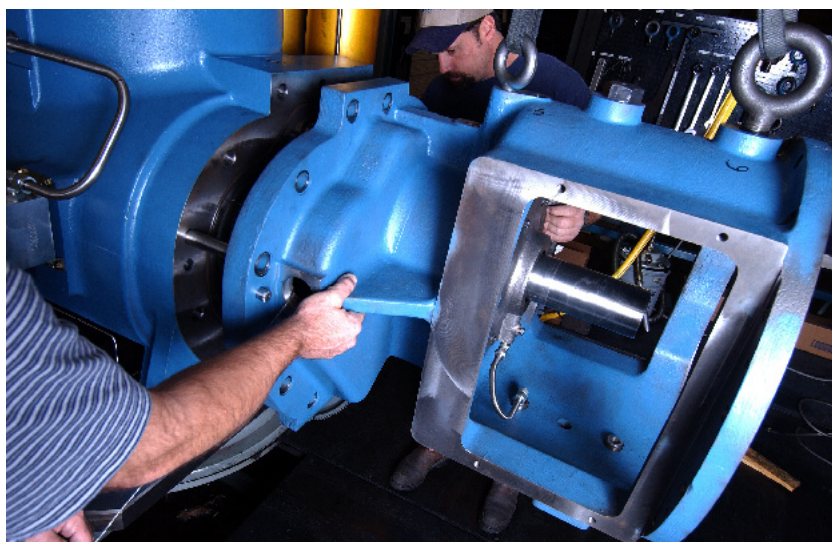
RE-INSTALLING GEARBOX ON COMPRESSOR
